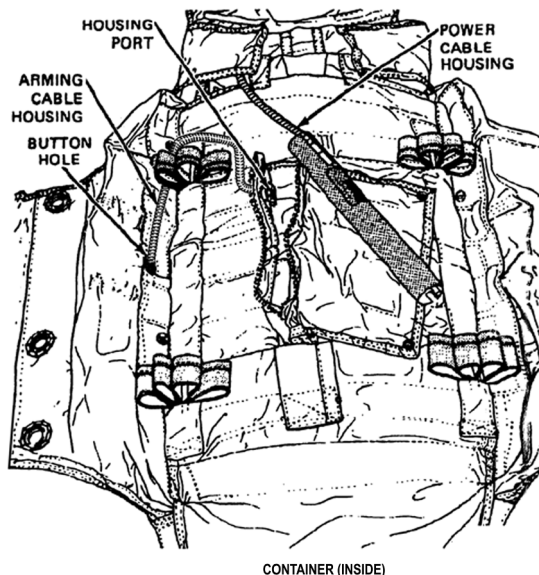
Attachment of Ripcord Release Arming and Power Cable Housing to Container
